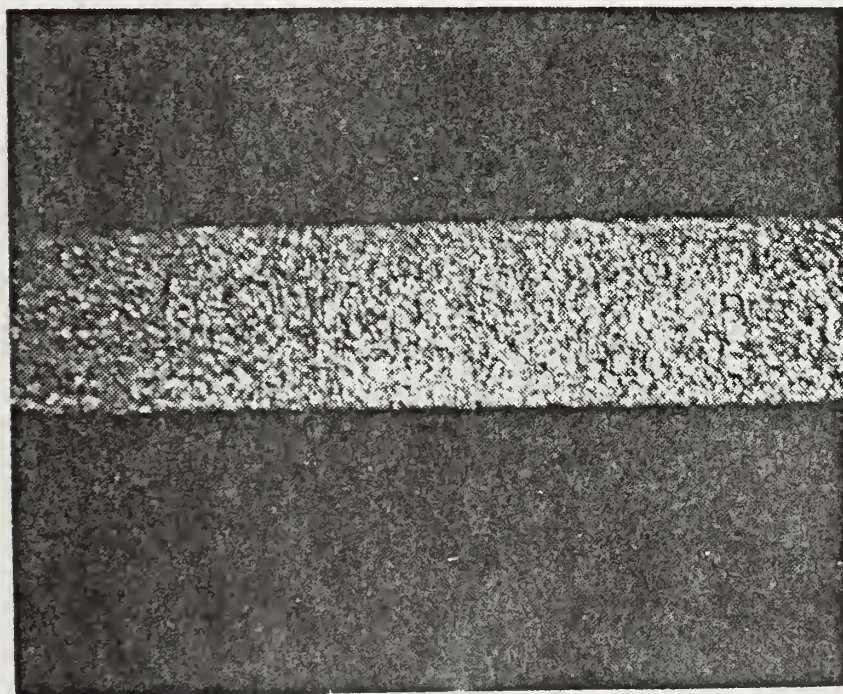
Macro-fractograph of a specimen from the same group as in Fig. 61. QI-0-7, which was fractured after 1,321,300 cycles at 40 ksi, shows a coarse fracture surface and absence of fatigue zone. X10.
